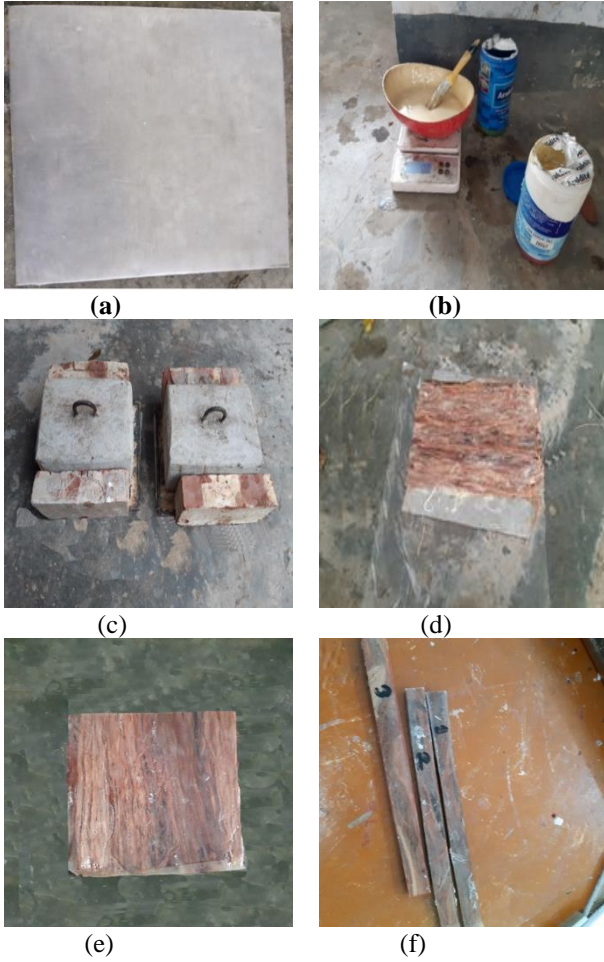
(a) Laminated plate; (b) Epoxy resin and hardener mixture; (c) Fiber layer on epoxy; (d) Composite material under the heavy weight; (e) Obtained composite material; (f) Specimen cut for testing.
